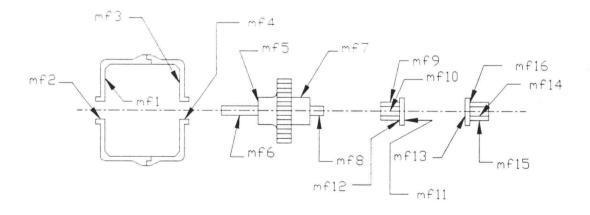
The Mating Features of the Components of the Gear Box (Wong & Ozsoy [5])
